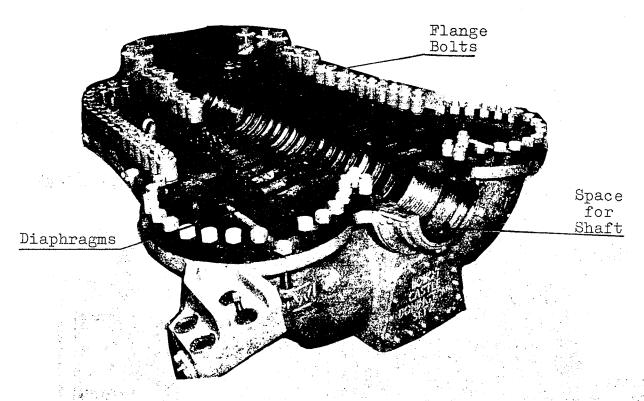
View of the lower half of the same casing depicted in figure 2.
